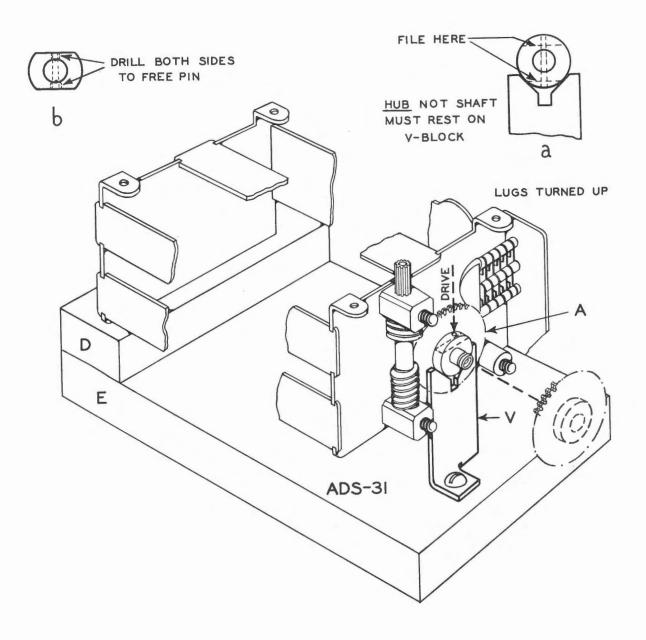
Condenser — Removal of Condenser Shaft Gear ARA or AN/ARC-5 Receiver
